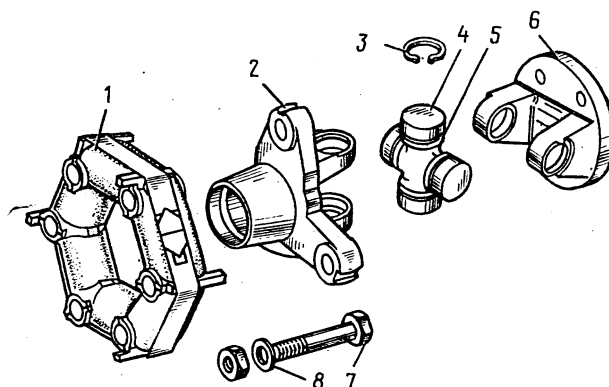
Parts of Intermediate Propeller Shaft:
